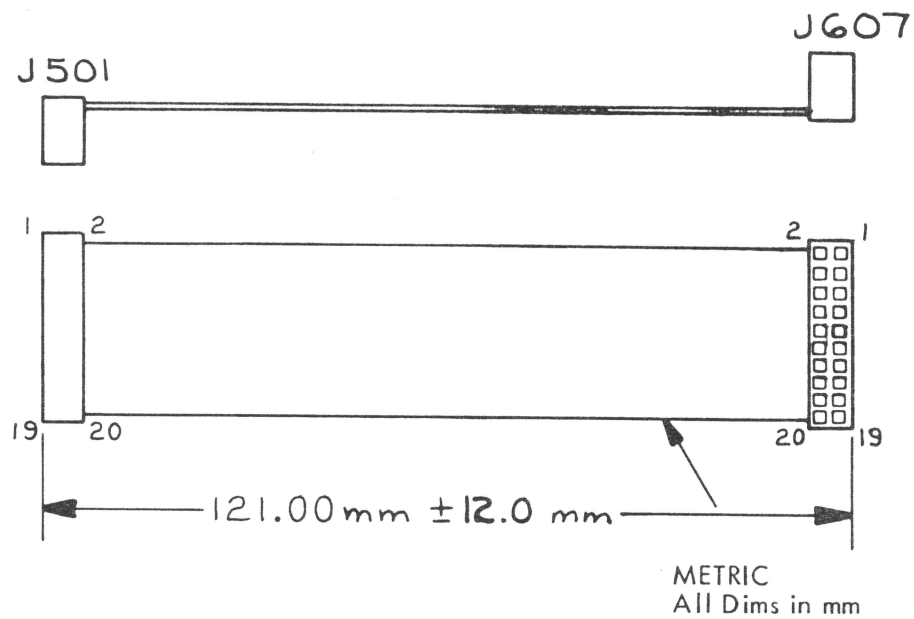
Keyboard-to-Motherboard Cable Assembly (P/N 47112)
